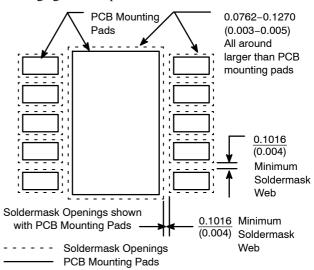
Typical DFN Package – PCB Mounting Pads Shown with Soldermask Openings
